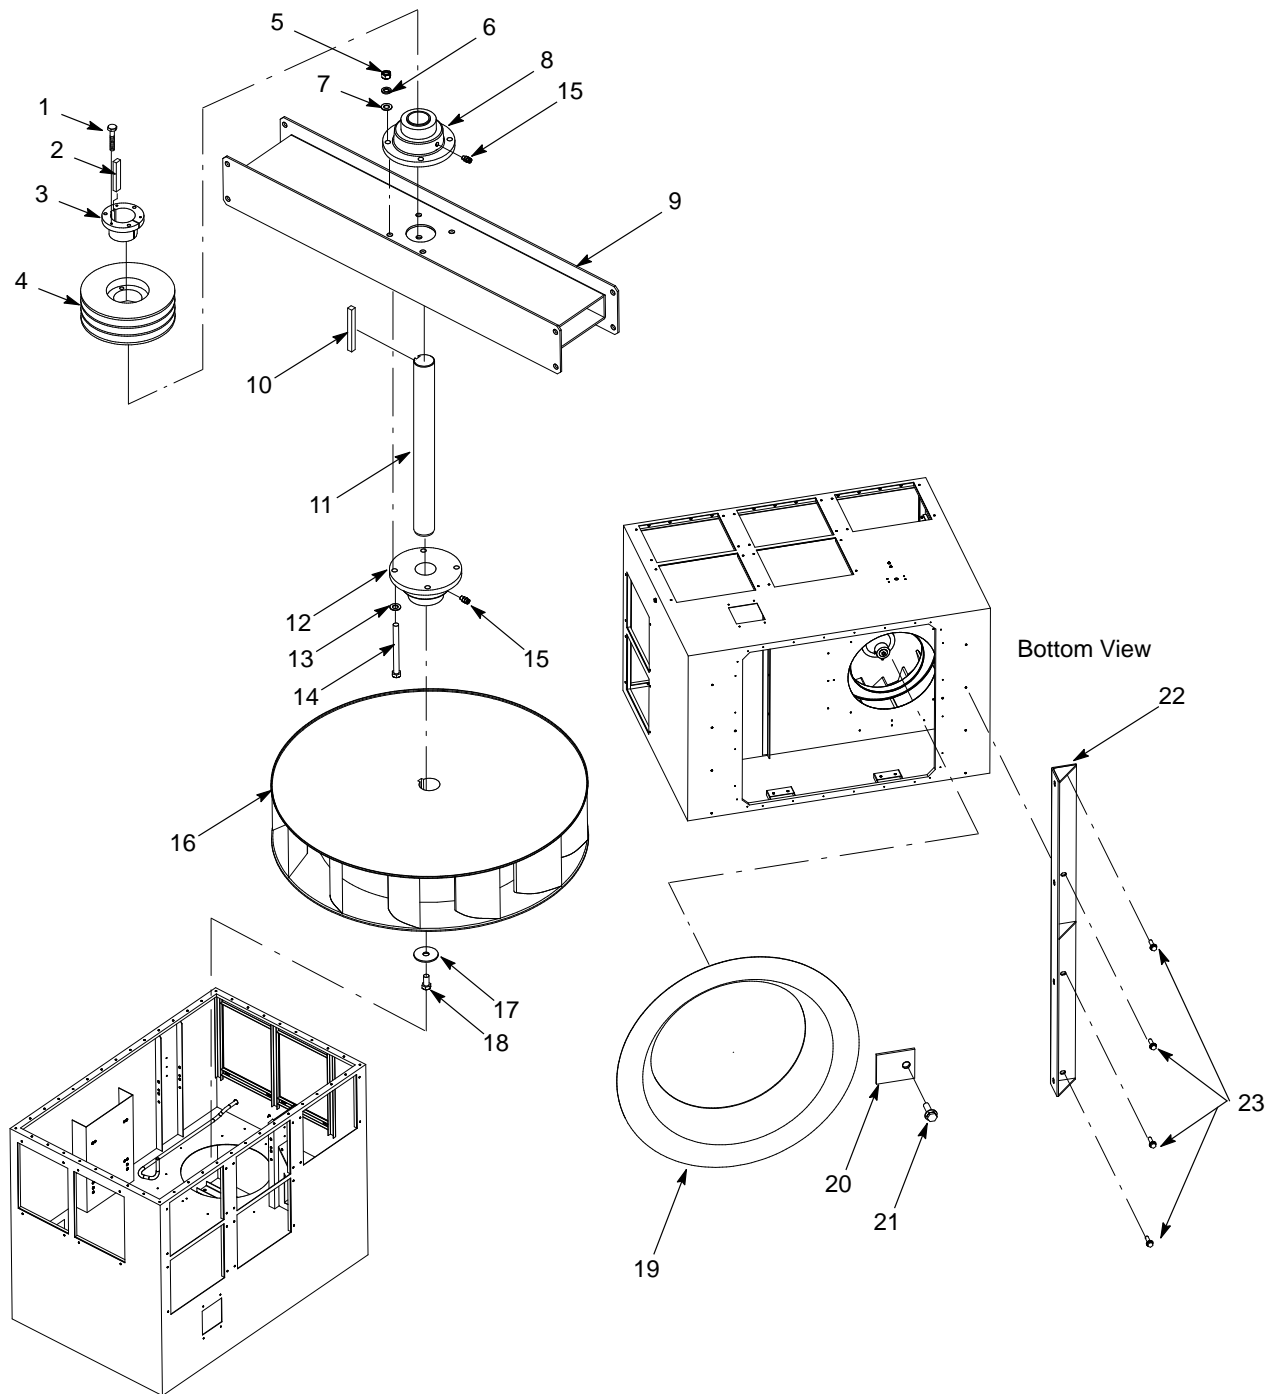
Fan, Sheave, Shaft, and Bearing Replacement
